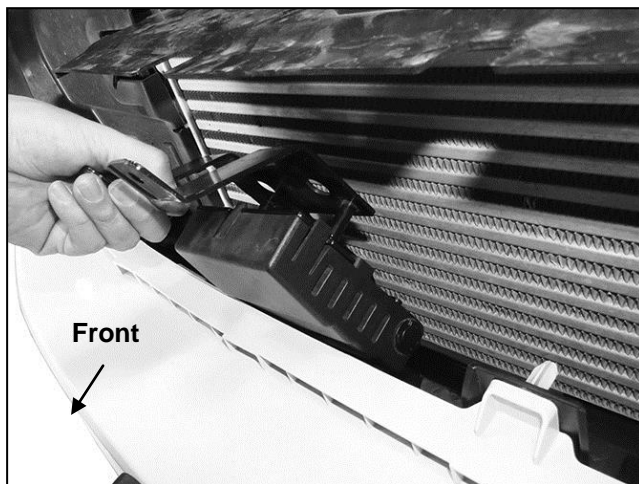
F-150 Models. Plug harness into sensor. Check fit of harness, secure harness to grille. Rewrap wiring harness. Reinstall shutter blades. Reinstall grille assembly
